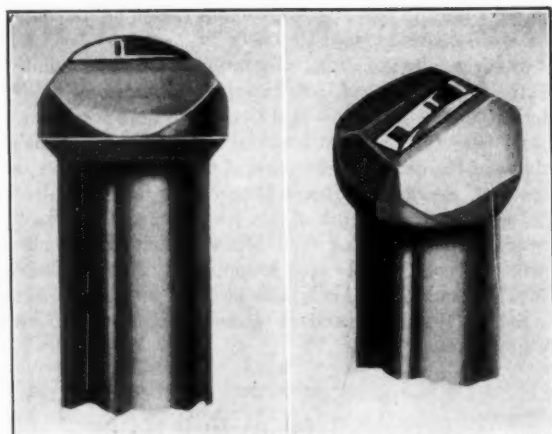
TOP VIEW OF SPECIAL-FORM RADIUS TOOL
